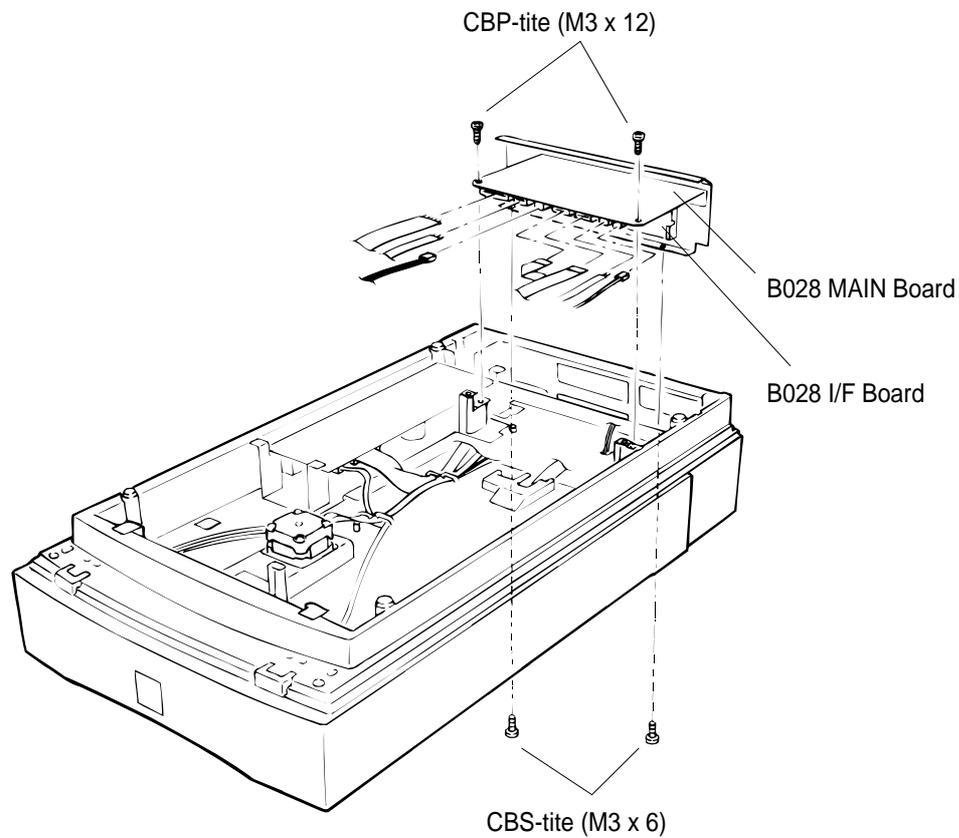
Removing the B028 MAIN and B028 I/F Boards
